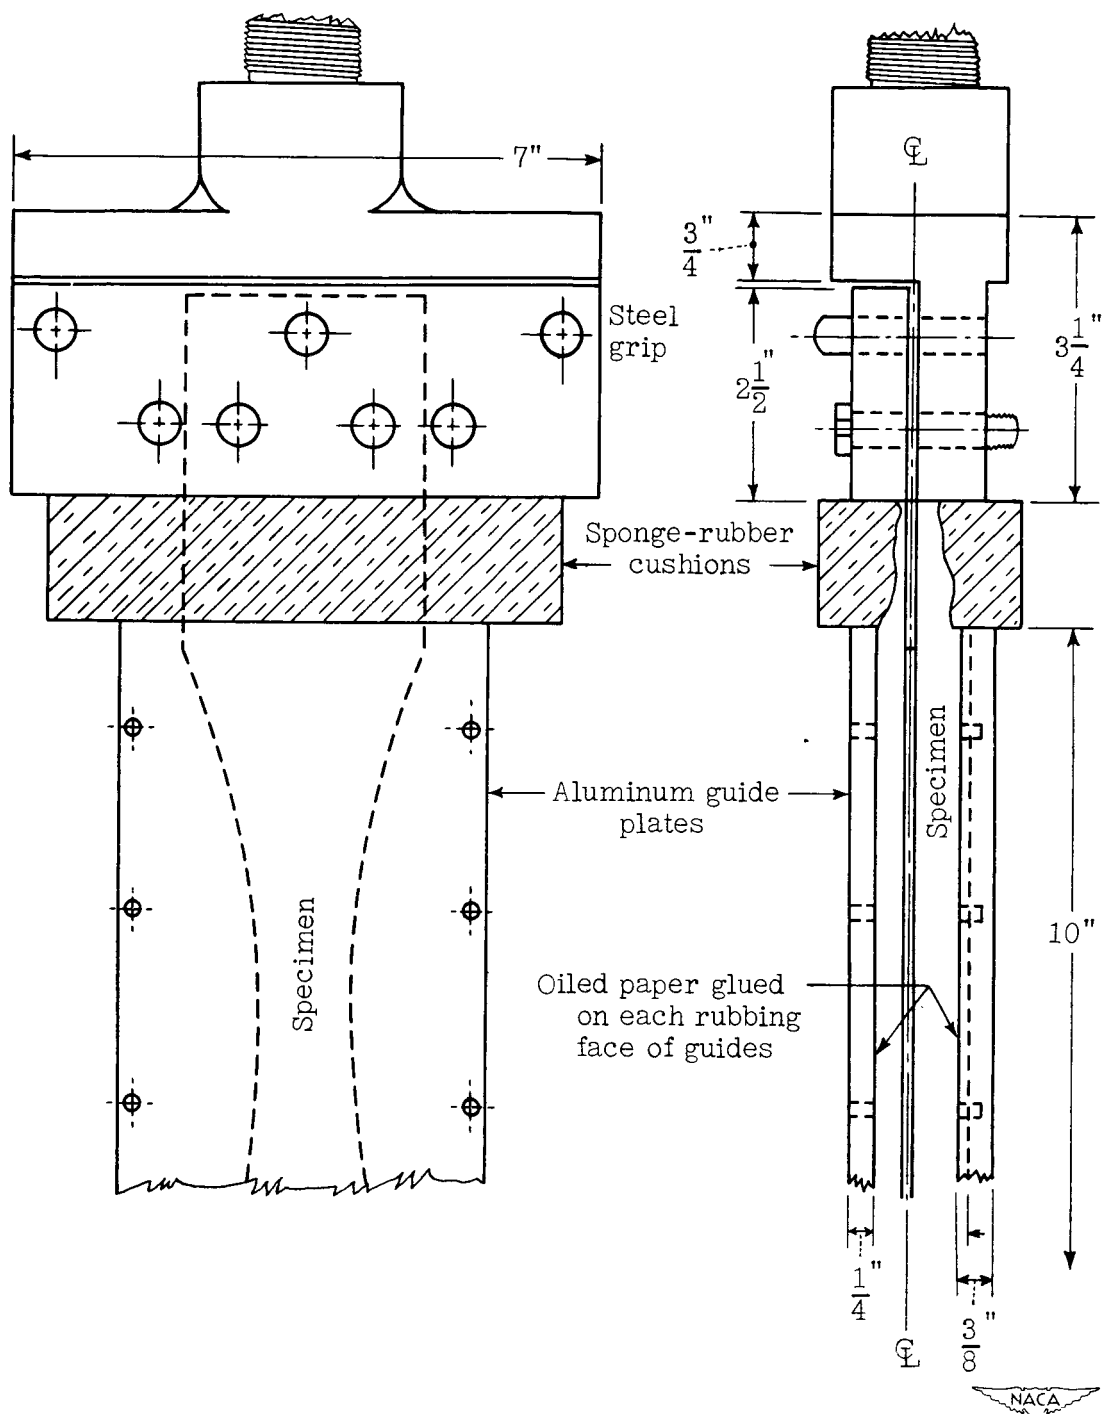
Close-up view of rigid grips and guide plates in testing position. Front support removed to show details.
